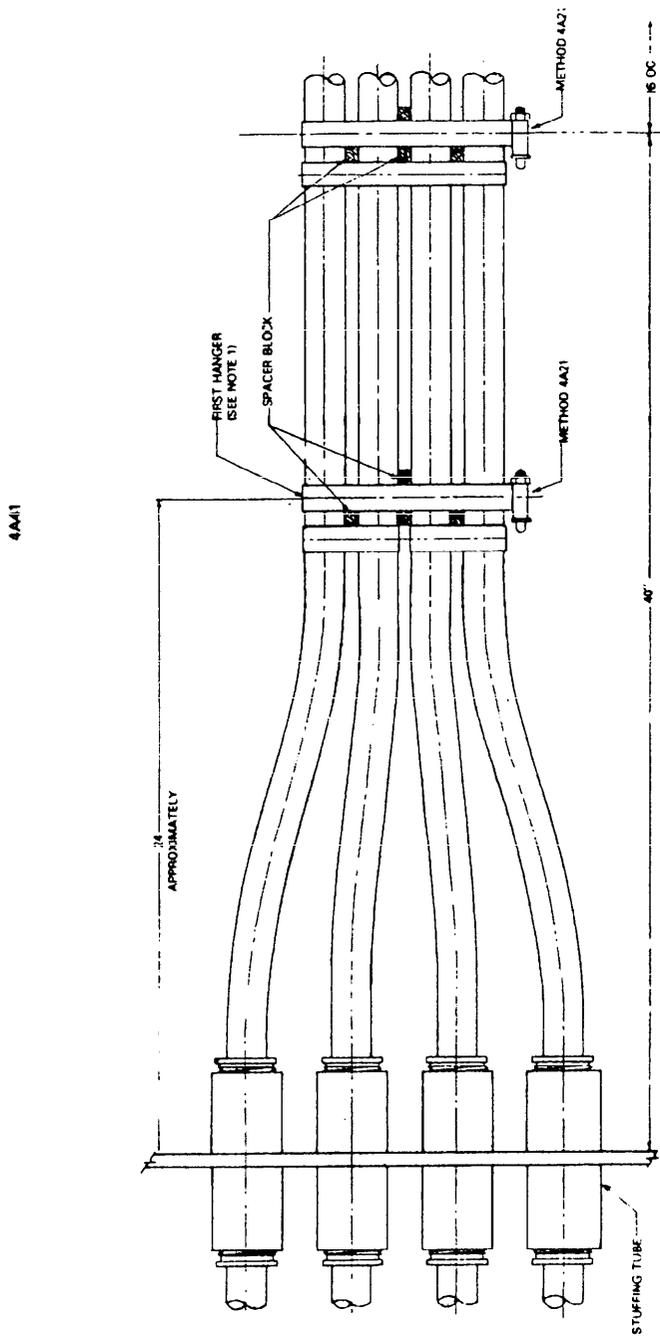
A4. Cableway adjacent to bulkhead penetration (submarines).
